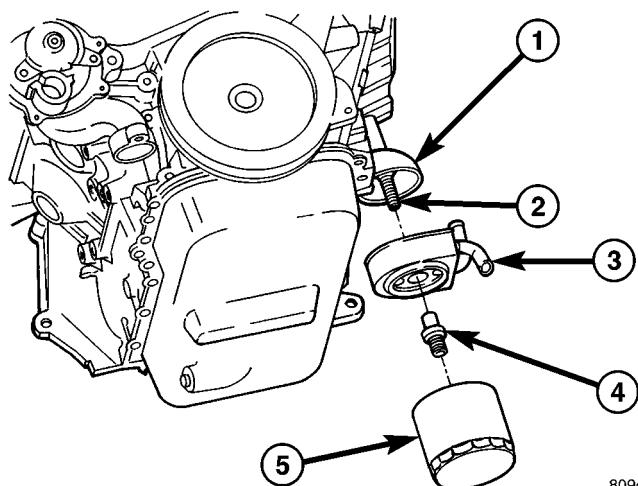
Engine Oil Cooler - 3.3/3.8L (Heavy Duty Cooling)
